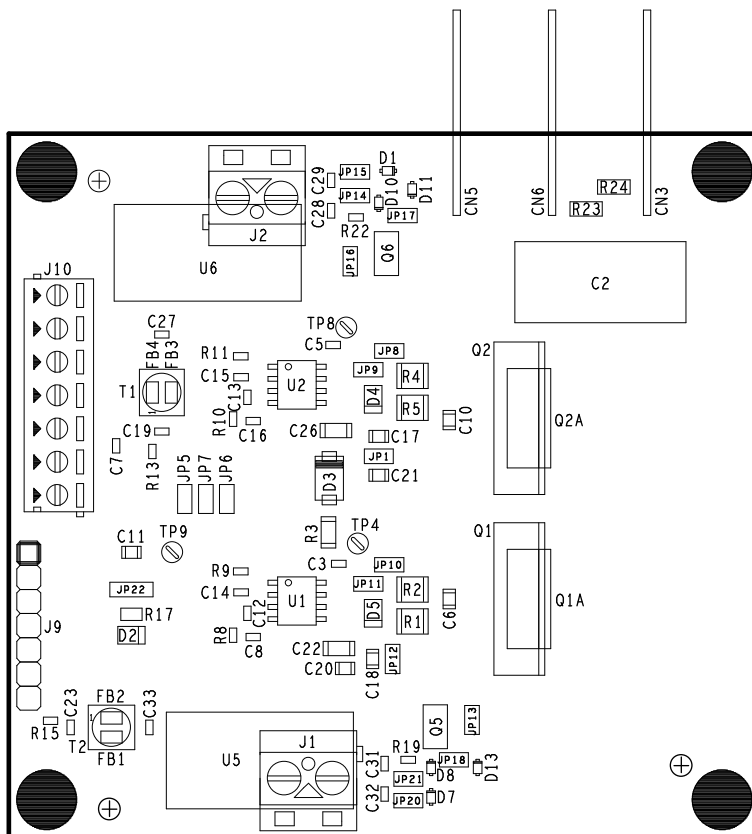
EVALSTGAP2SAC layout - component placement bottom view
